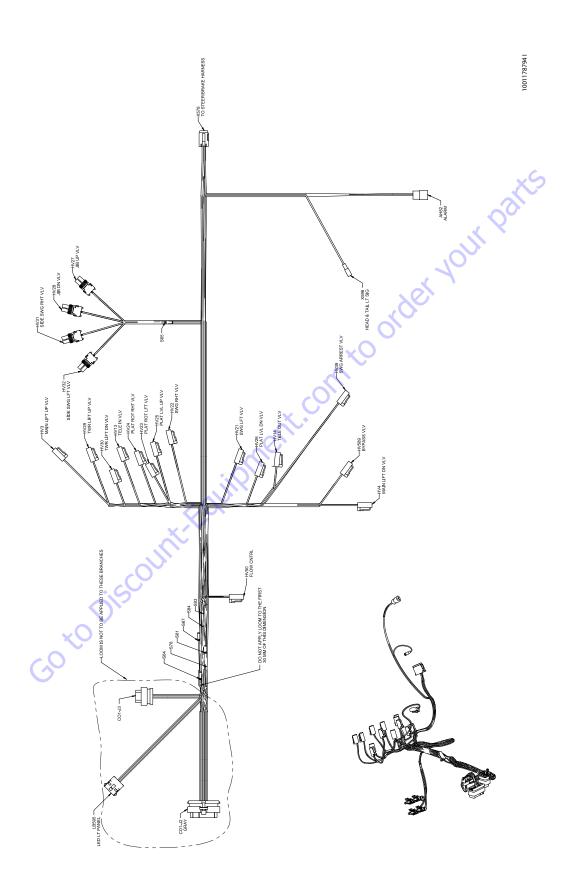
Main Valve Harness - Sheet 1 of 3
